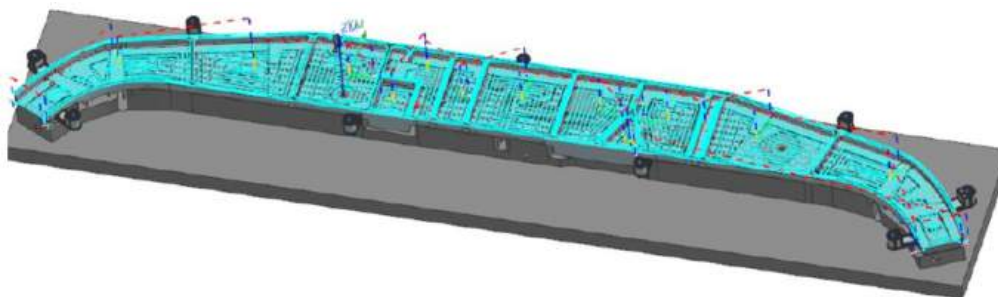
View of toolpaths finish milling operations performed on a vacuum fixture in NX CAD/CAM.
